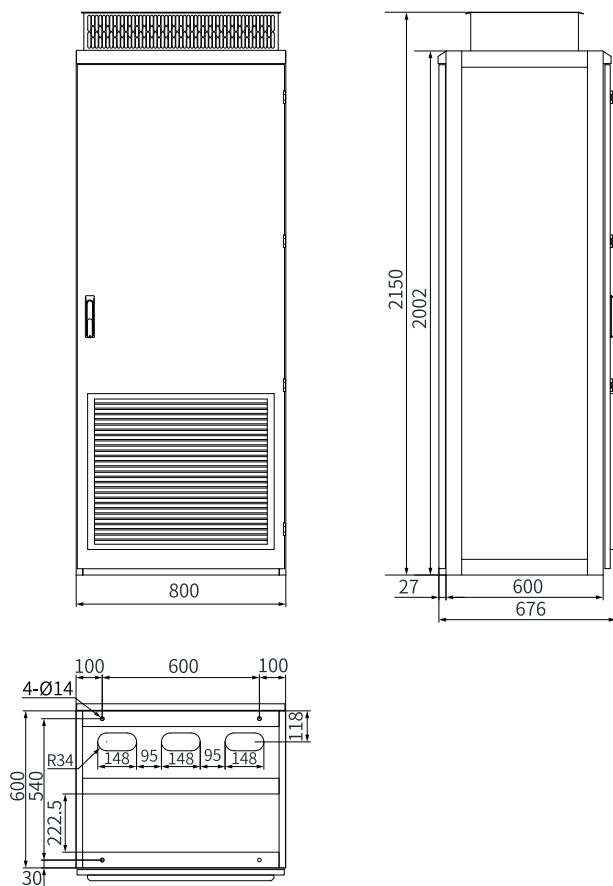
800-mm wide H8 drive cabinet (mm)
